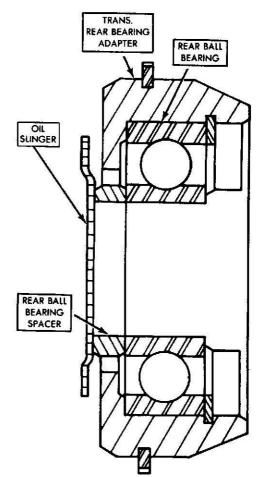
Tremac 3-Speed Manual Transmission Rear Bearing Adapter, Rear Ball Bearing, and Oil Slinger
